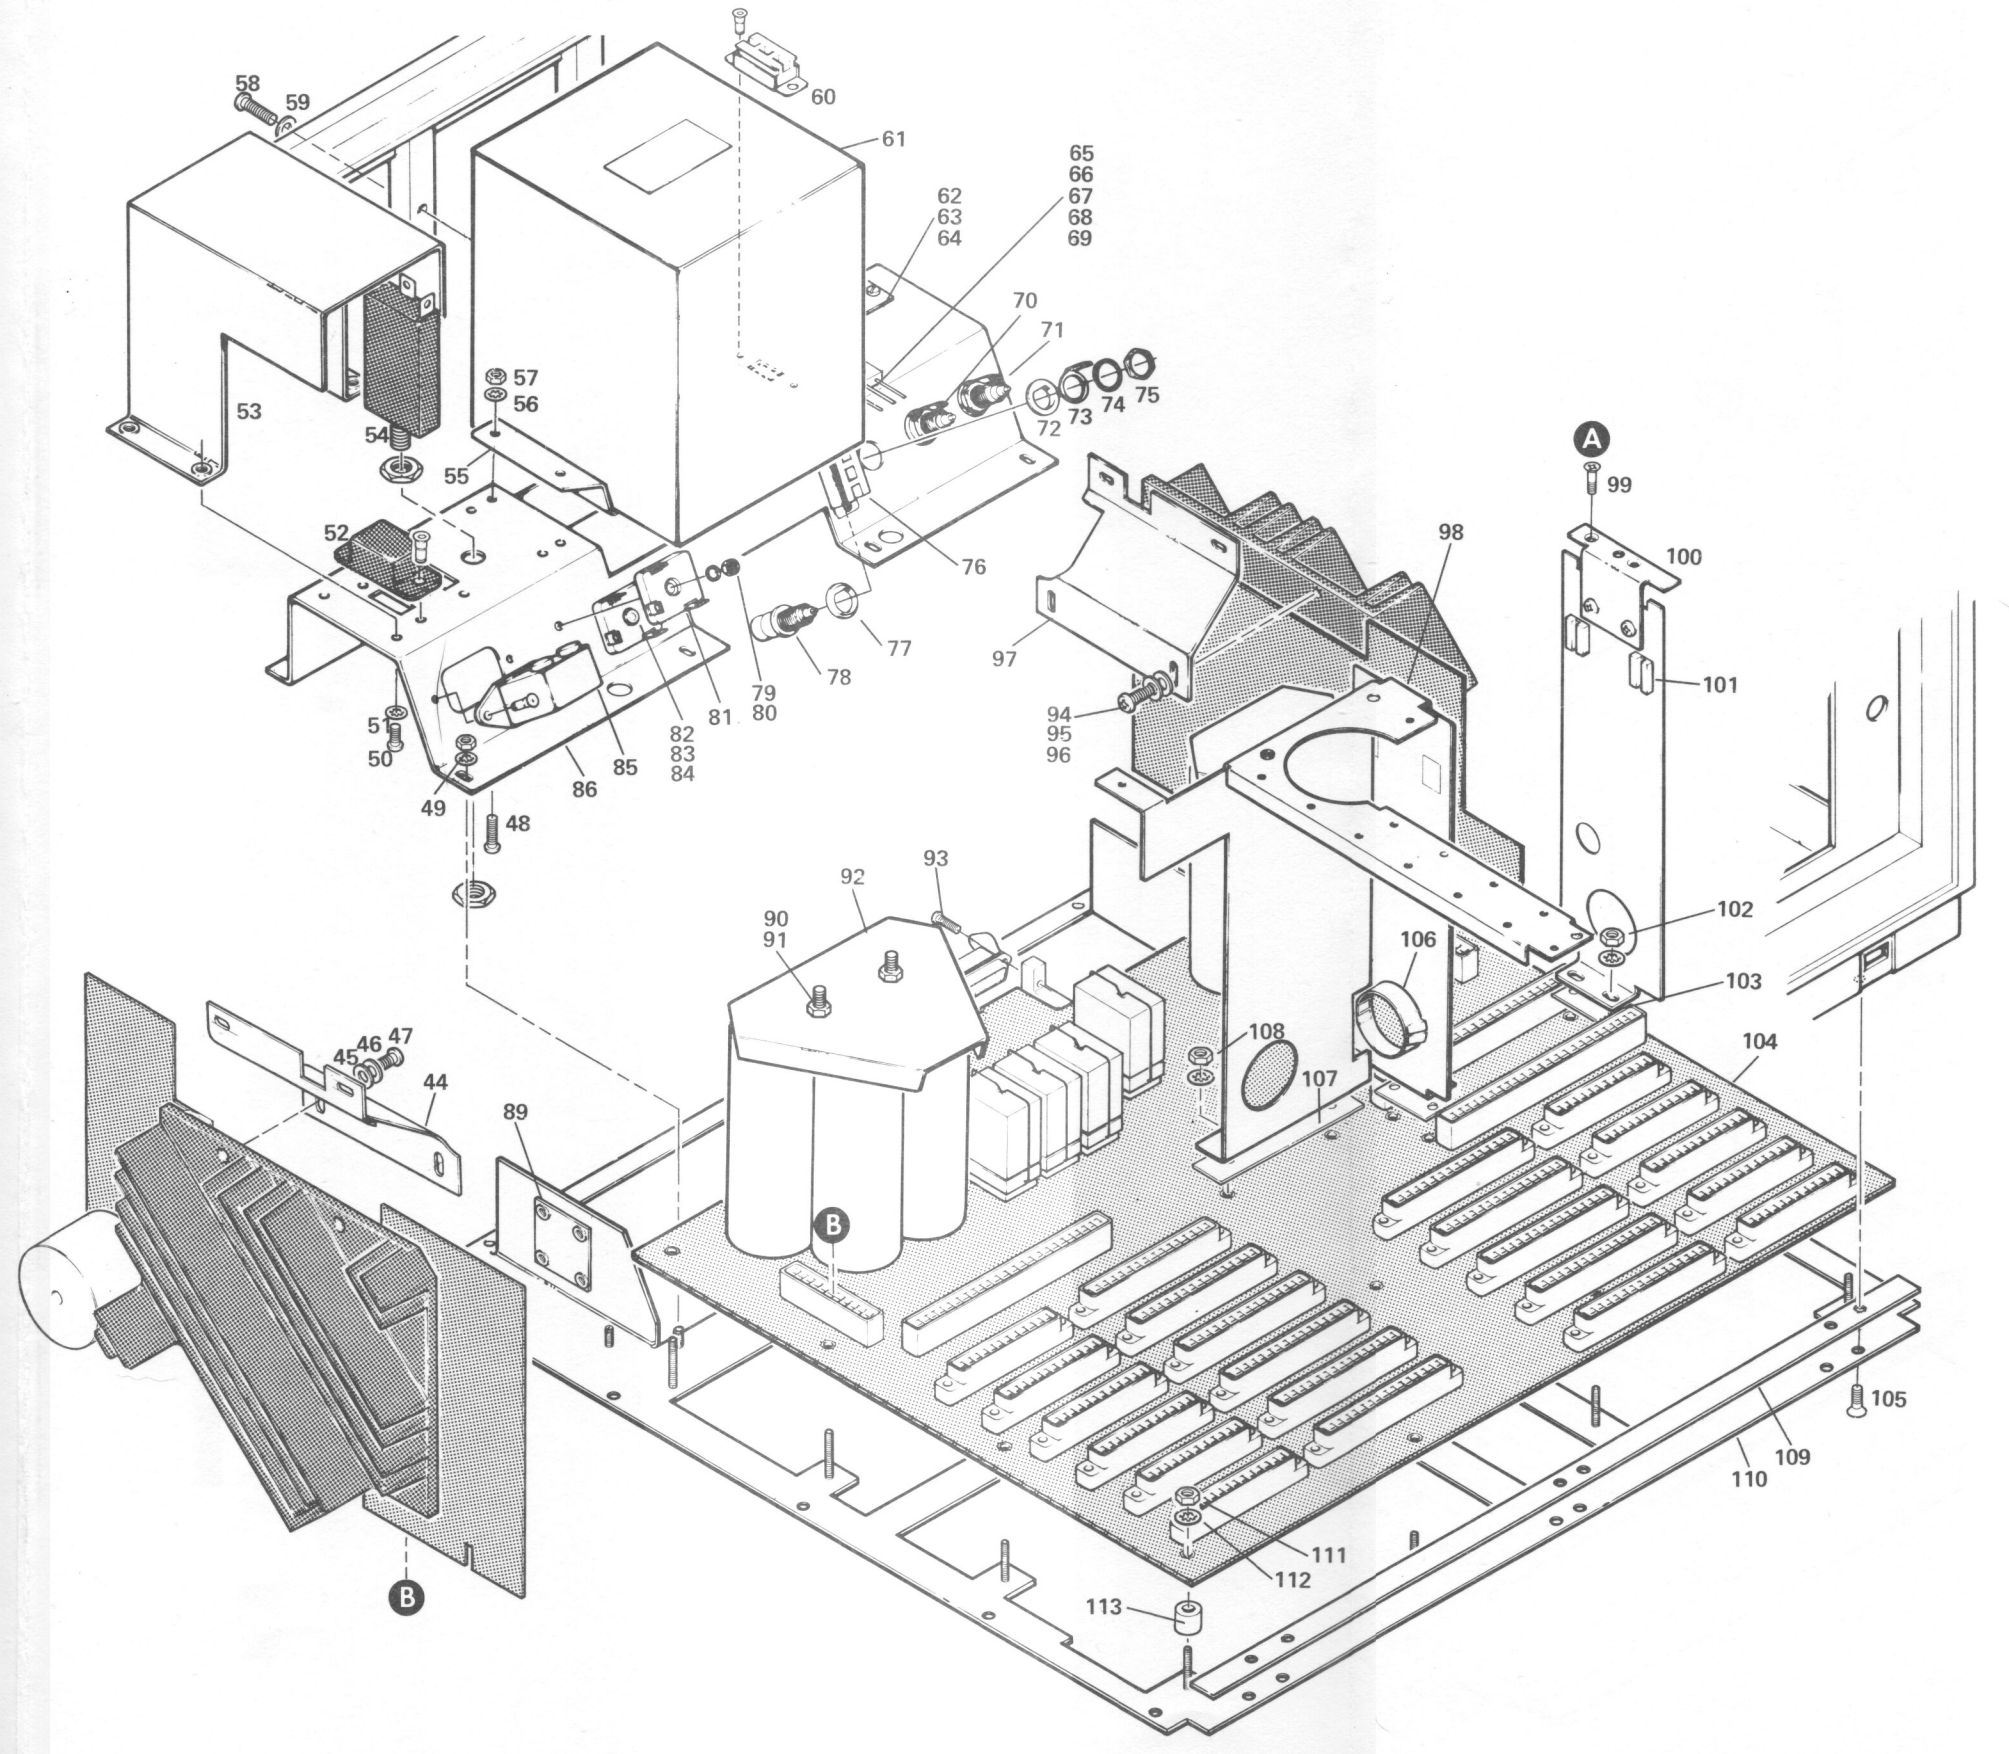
Model 3964A/3968A Main Frame, Exploded View
